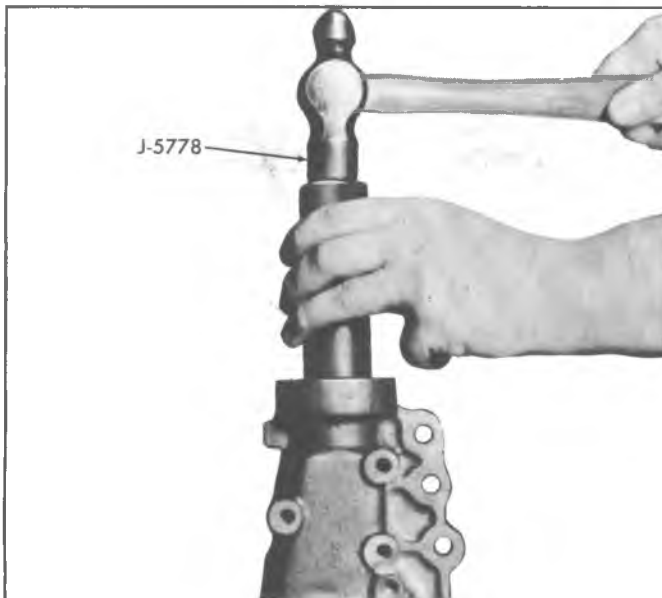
B-11A—Removing or Installing Rear Extension Bushing
